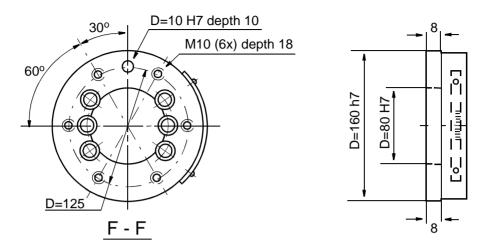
The mechanical int erface (mounting flange) ISO 9409-1-A125 (dimensions in mm).
